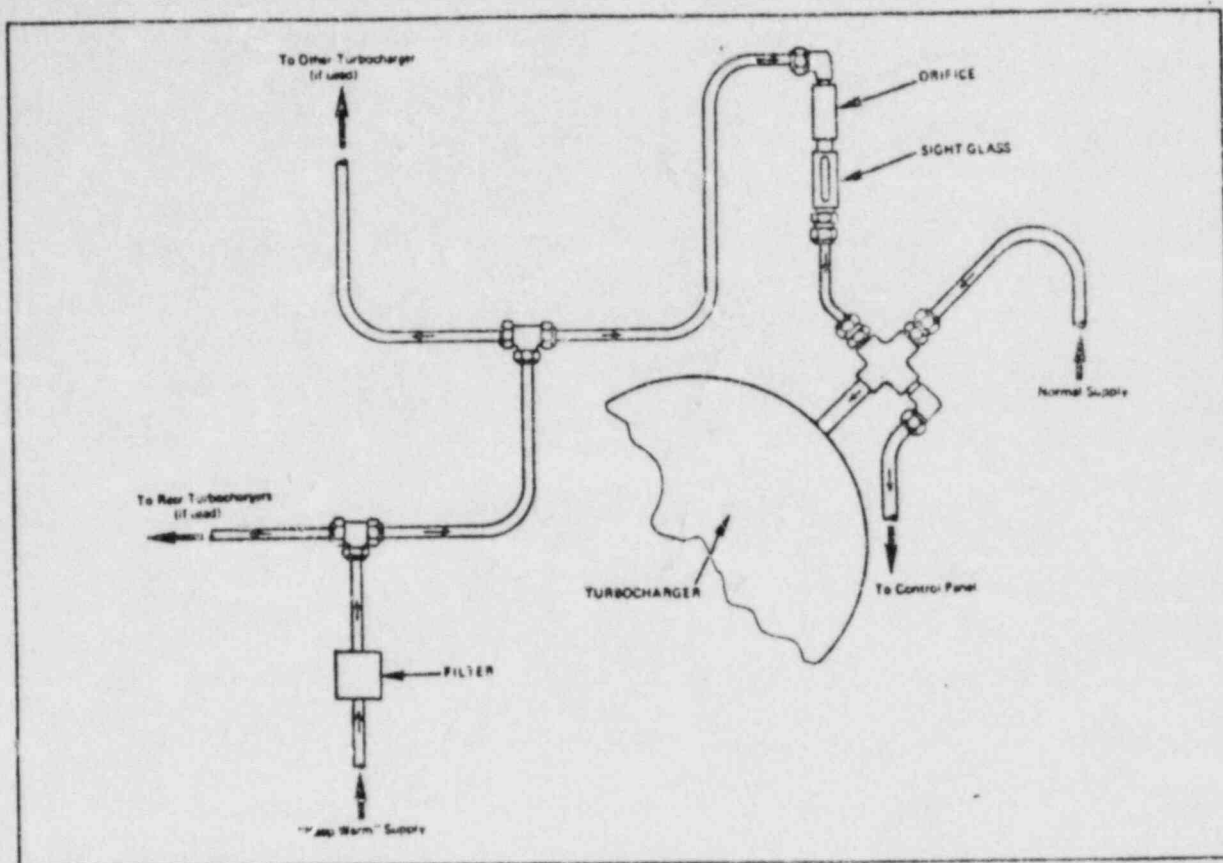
K-5. Turbocharger Bearing Drip Lubrication System
